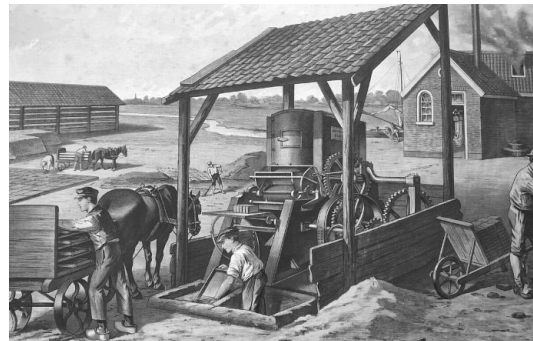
Machine for making bricks, from: <https://www.weldadigoord.nl/weldadige-oorden/kolonieschooltje/>
